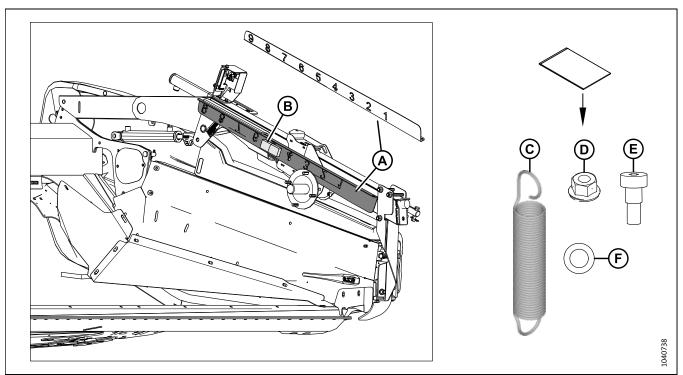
Fore-Aft Indicator Shipping Location, Parts Bag MD #368002
